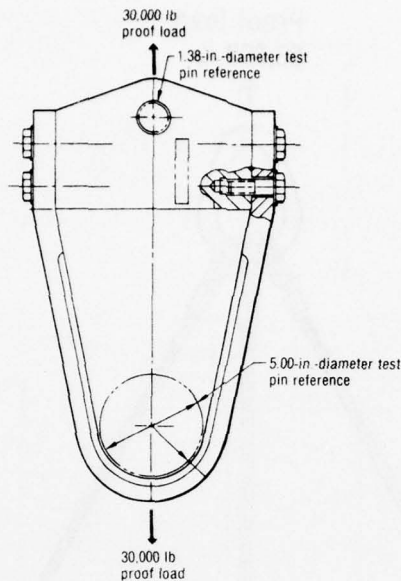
Proof Load Diagram -- C11151 Stirrup
